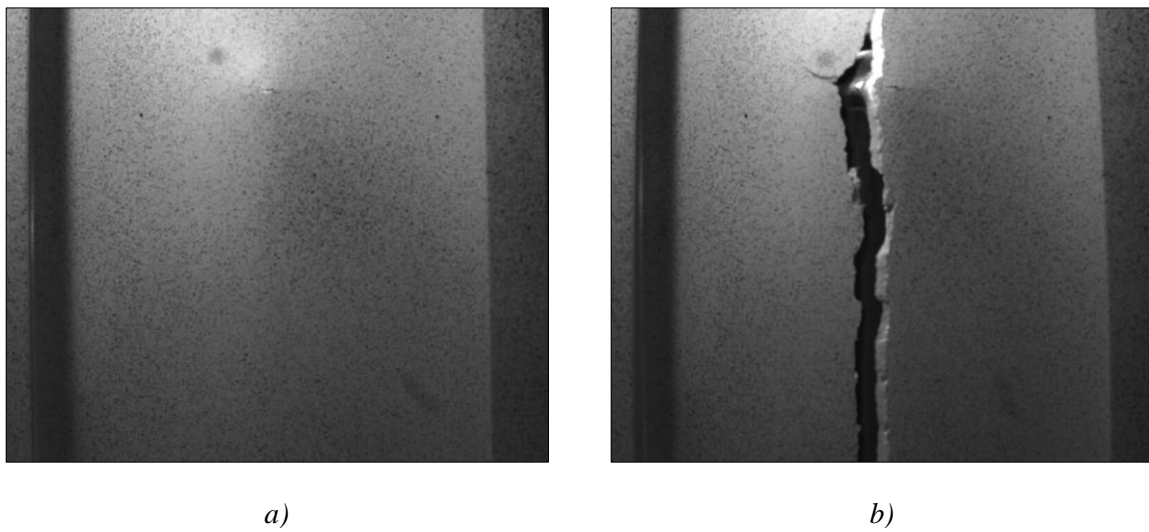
Fracture in QSLE2. a) right before fracture and b) right after fracture
